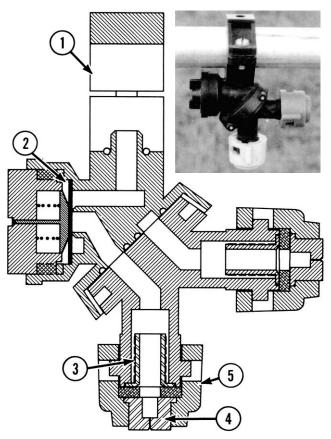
Swivel-Jet Diaphragm Dual Nozzle Body Assembly: (1) Split-Eyelet Clamp, (2) Diaphragm Check Valve, (3) Strainer, (4) Nozzle Tips, and (5) Quick-Disconnect and Self-Aligning Nozzle Cap.
